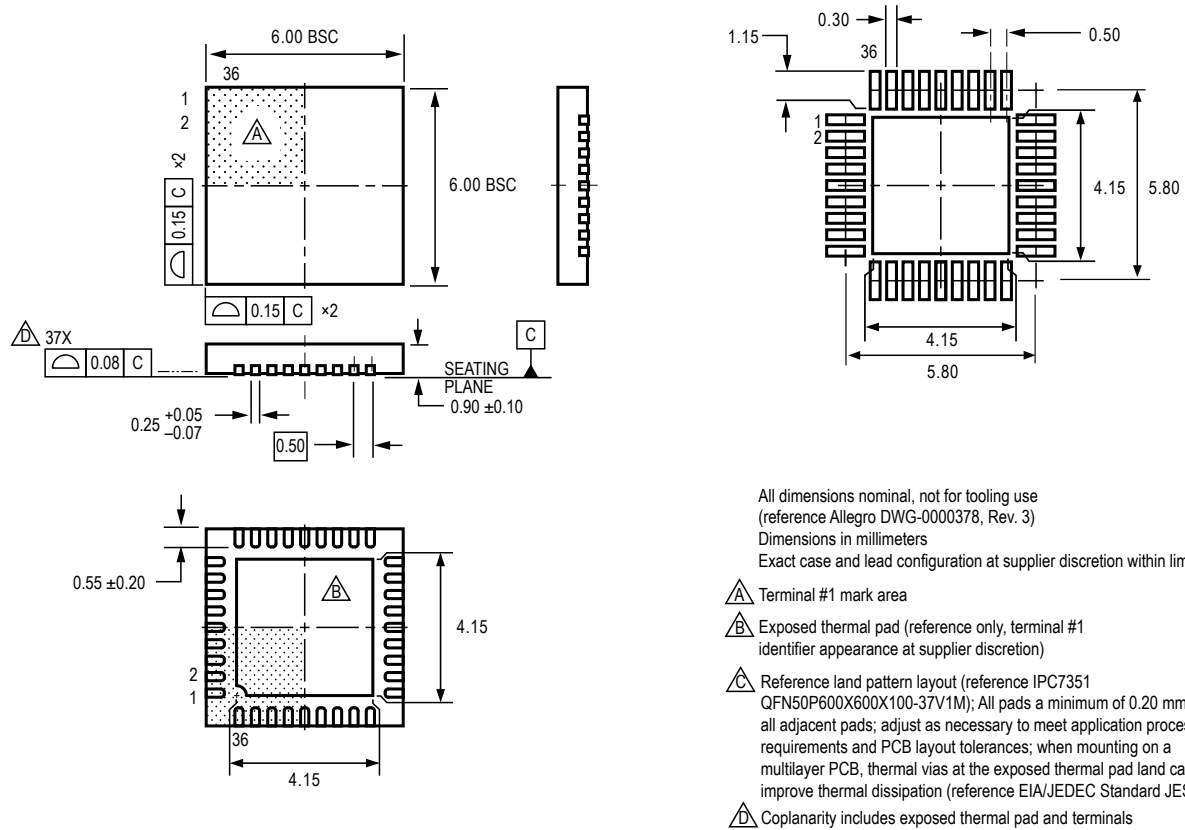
EV Package, 36-Pin QFN with Exposed Thermal Pad
